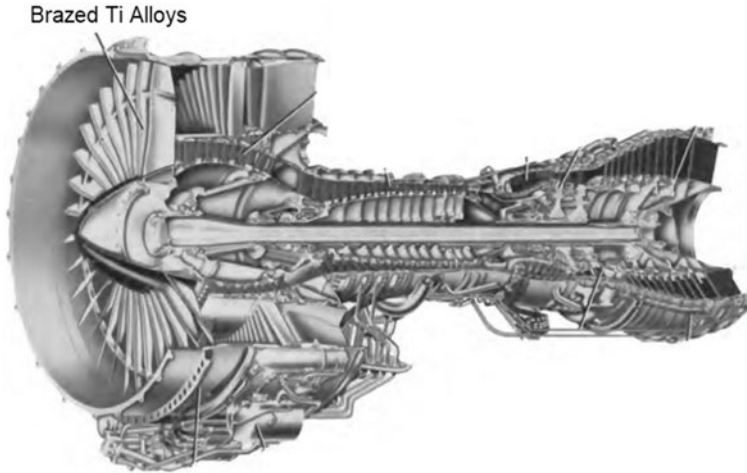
Large fan turbojet engine with brazed sheet metal vanes. Reprinted by permission from Elsevier
